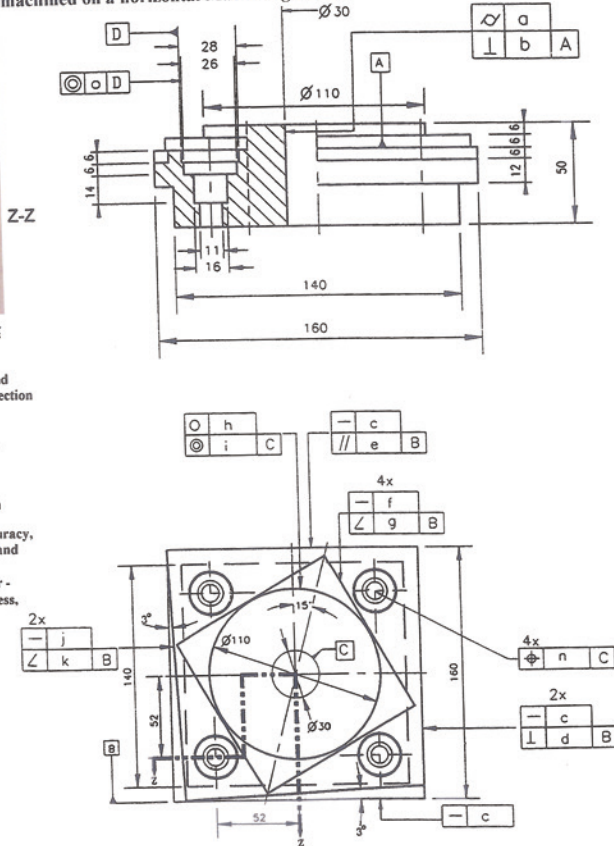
Small-sized machining testpiece for machine capability assessment
